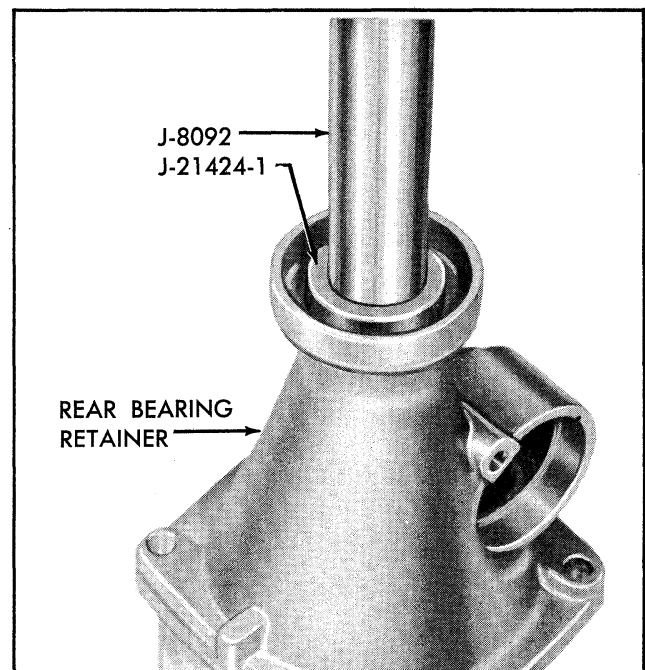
B-33 Installing Rear Bearing Retainer Bushing
